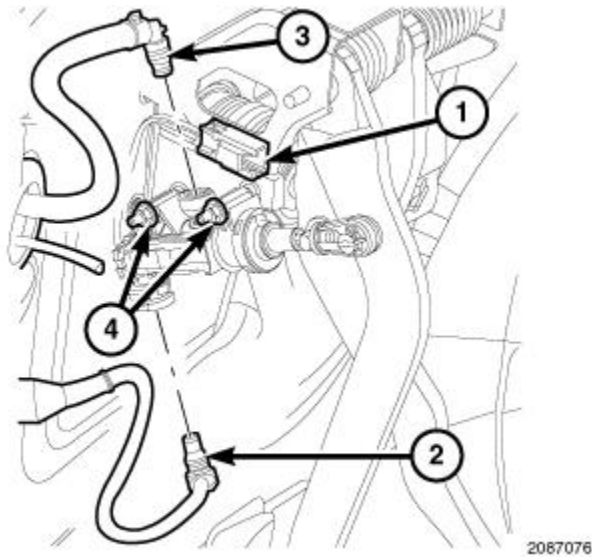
Brake/Clutch Fluid Reservoir Tube, Clutch Hydraulic Line & Connector
